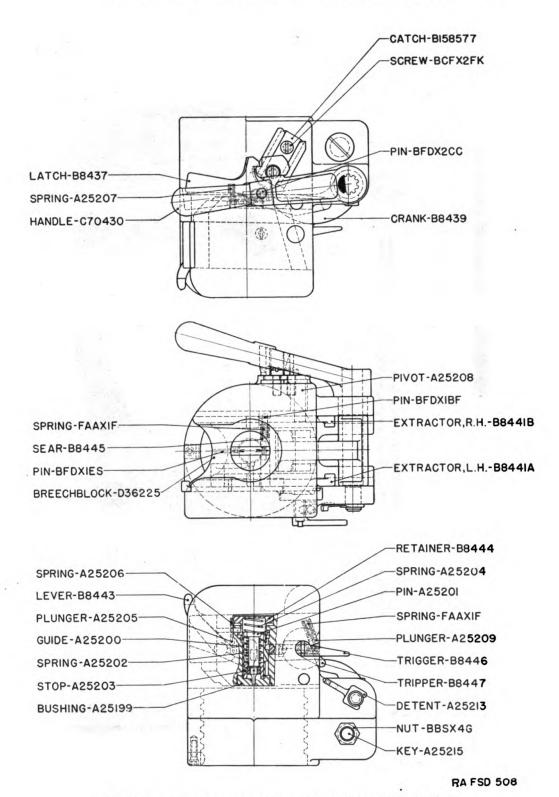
37-mm gun (tank) M5-breech mechanism assembly.
